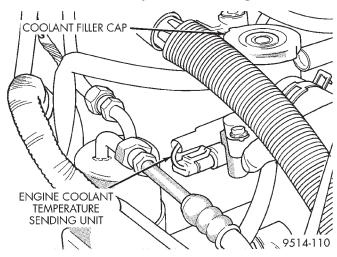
Engine Coolant Temperature Sensor—2.4L Engine
